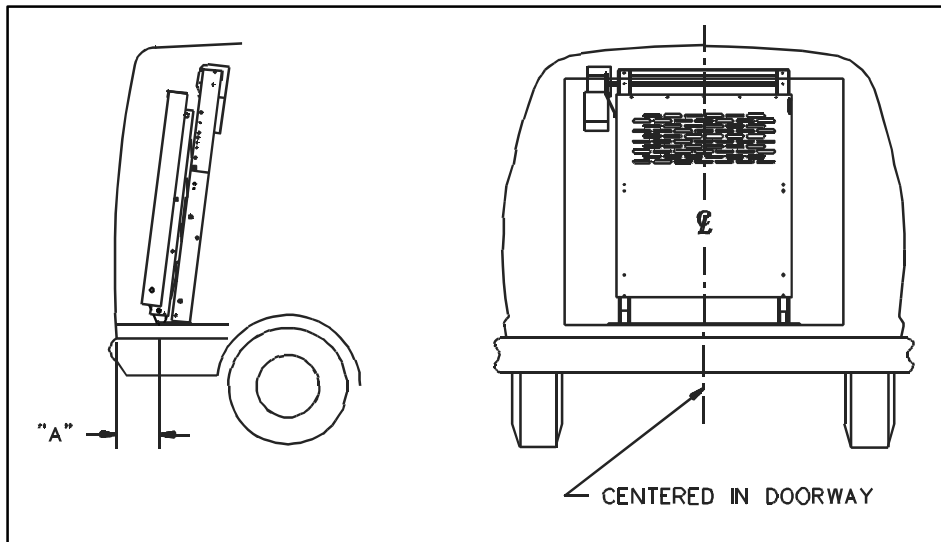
REAR DOOR INSTALLATION CLEARANCES
